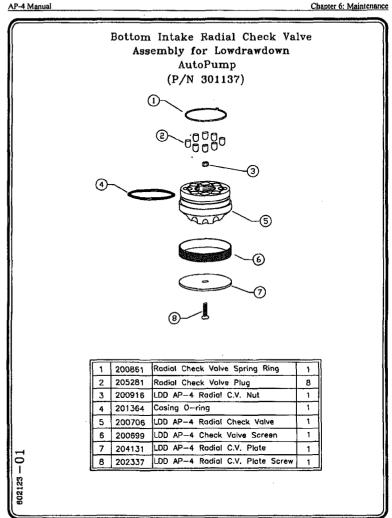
Exploded View of Bottom Intake Radial Check Valve for Low-Drawdown Pump
